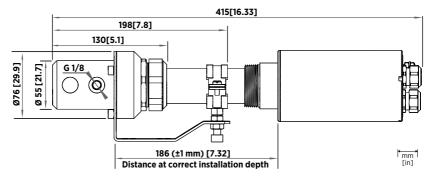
Flow-Through Adapter Dimensions with MGP261 Probe
